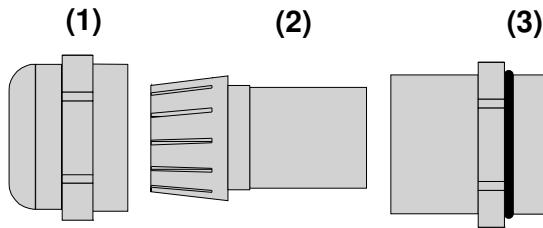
The different parts of the cable gland: (1) cap nut, (2) compression part, (3) basic part
